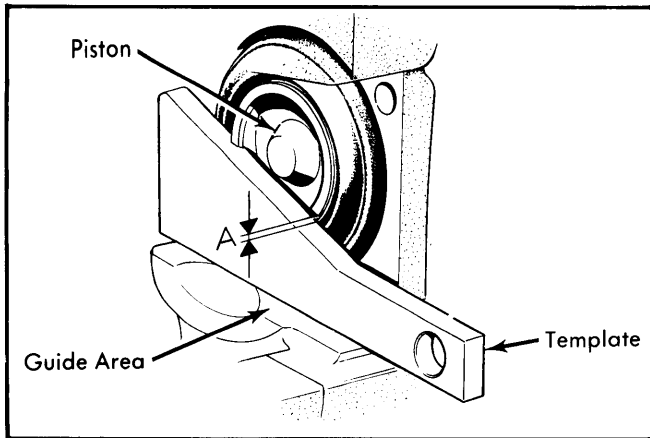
Checking Piston Angle (Rear Brakes Only)
